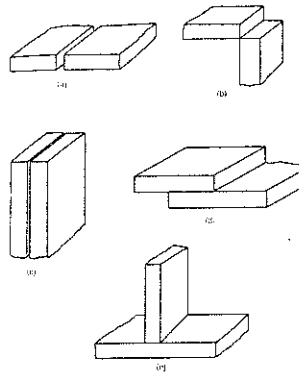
The five basic weld joint designs used in structural fabrication: (a) butt joint, (b) corner joint, (c) edge joint, (d) lap joint, (e) tee joint (4).
